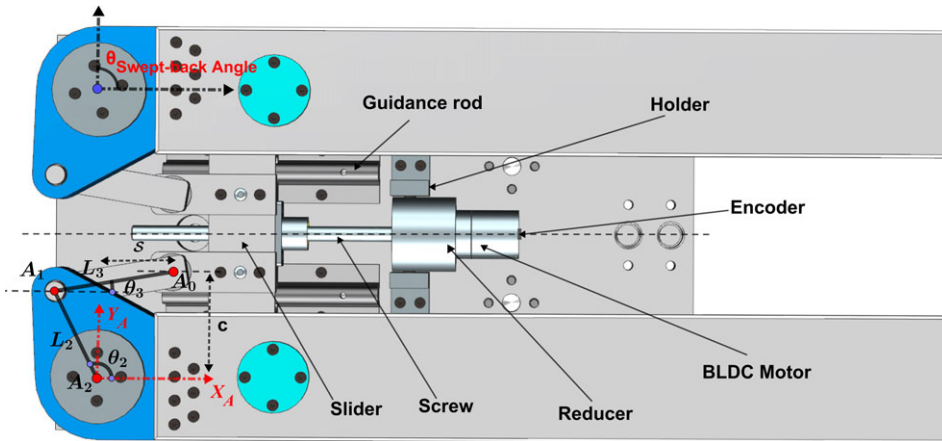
CAD design of the FWS at 90° swept-back angle: components and mechanism illustration.
